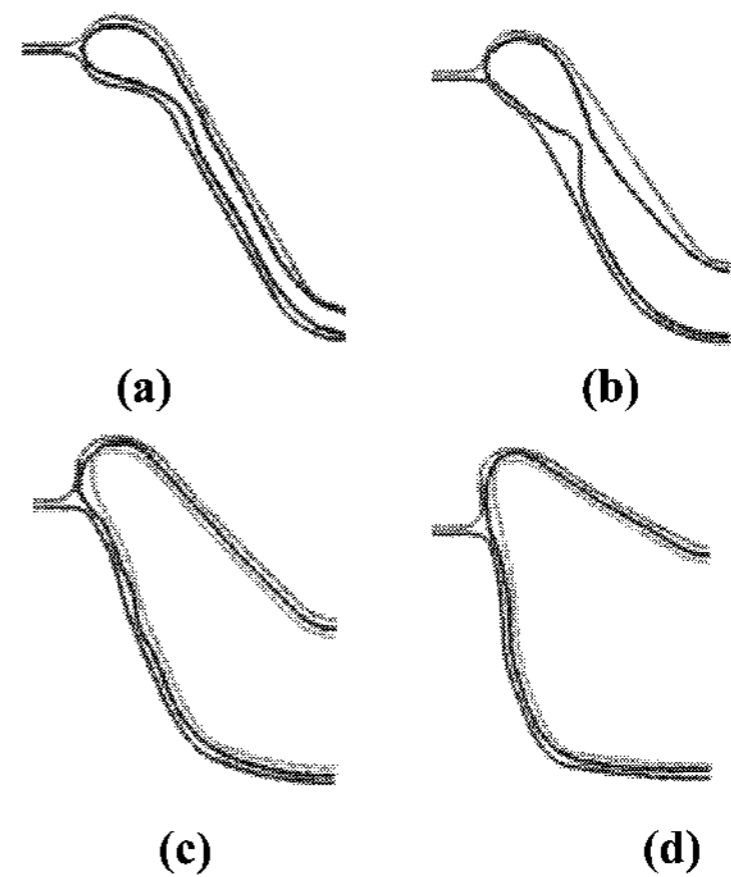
Shape of cross sections of tools and the tube with the initial design after the OP20 stage: at sections (a) A-A'; (b) B-B'; (c) C-C'; (d) D-D'
